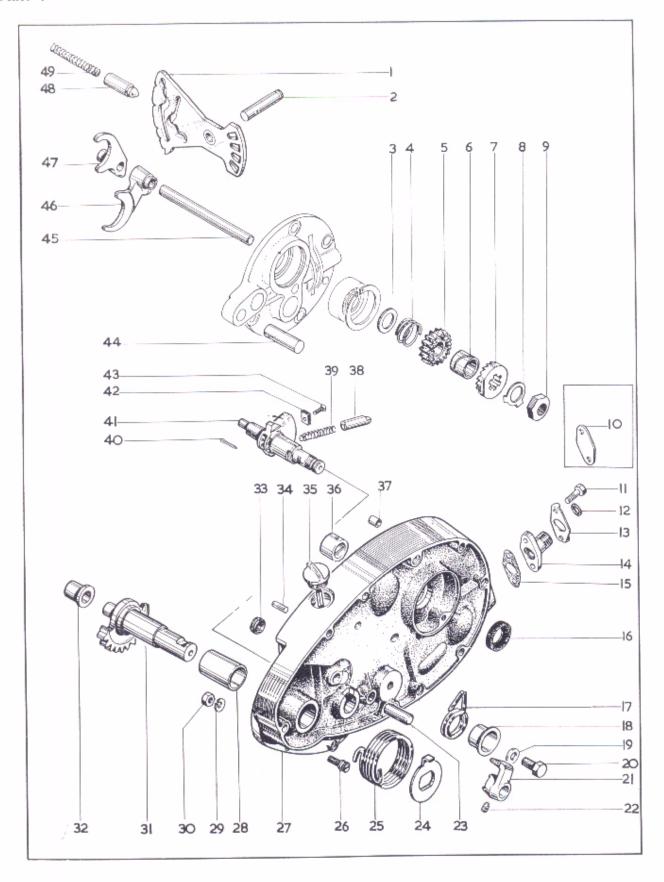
INNER TIMING COVER, GEARCHANGE MECHANISM
